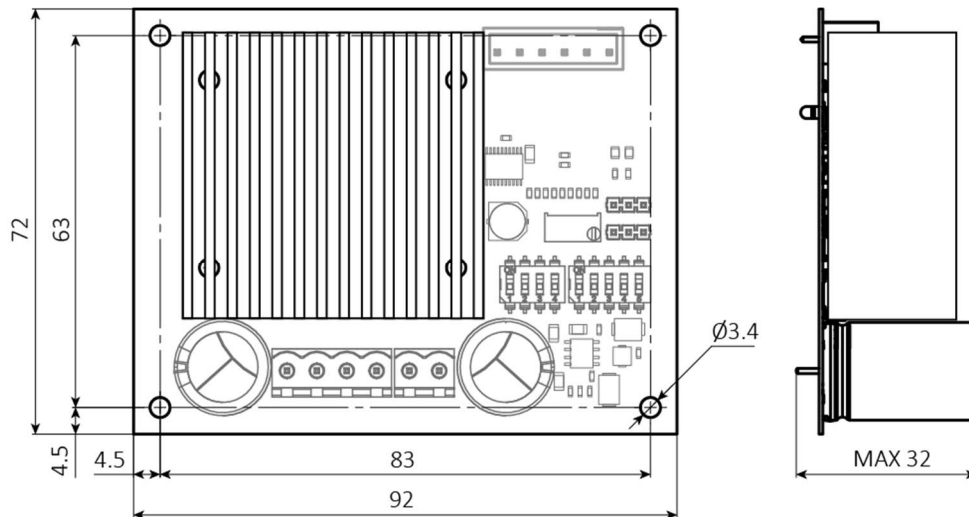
Dimensions of stepper motor driver SMD-8.0 open frame version
